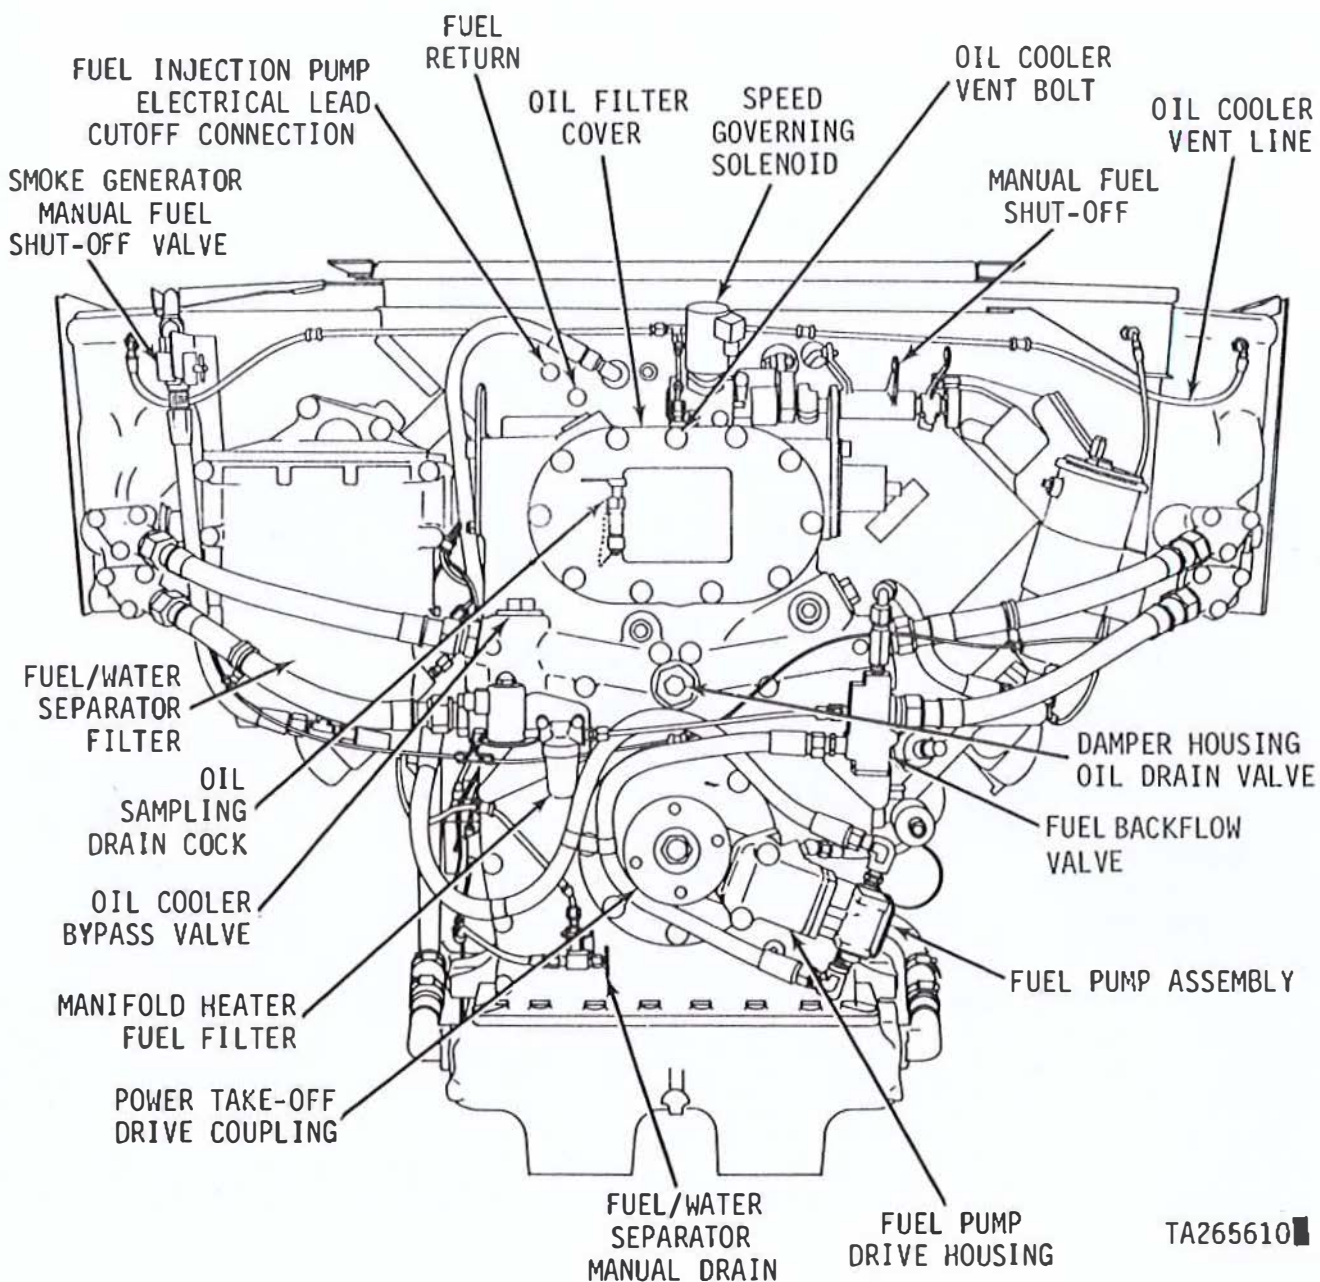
AVDS-1790-2DR engine assembly - front view.
